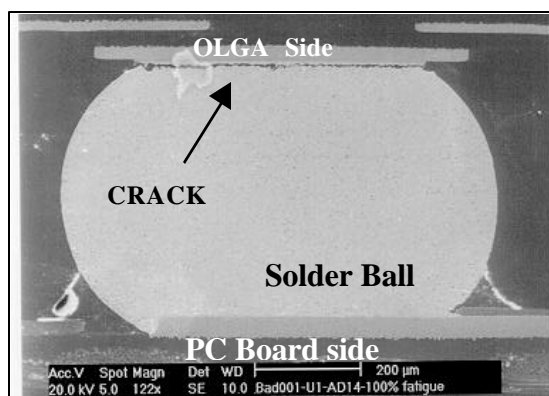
Cross-section scanning electron micrograph of a solder fatigue crack after 1000 cycles of T/C X on a peripheral array package mounted on a FR4 substrate test vehicle 1 (TV1). The crack extended throughout the BGA joint diameter. This particular BGA joint was the centermost joint in the innermost row of the BGAs.
